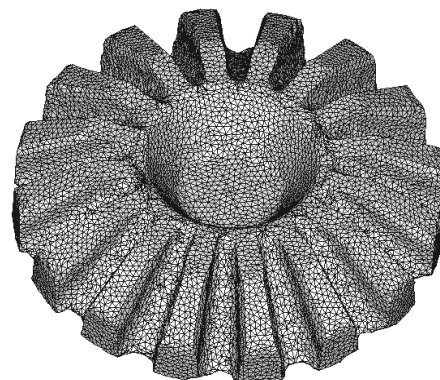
Schematic view of dies for conical gear wheel precision forging
